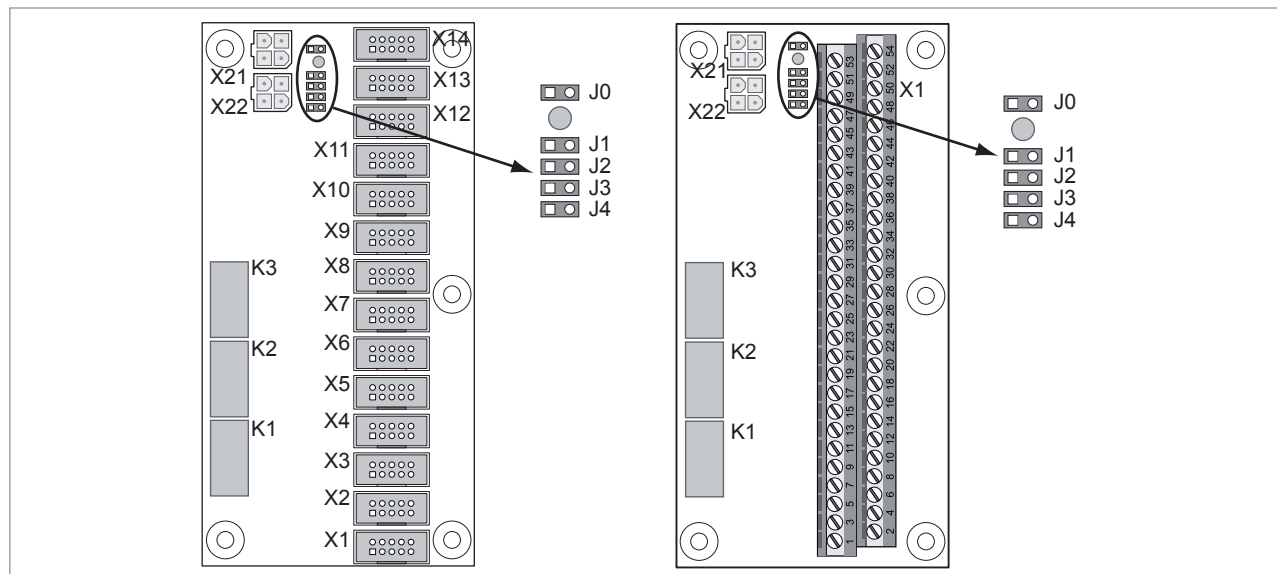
Circuit board drawing ADM-XF and ADM-XK
